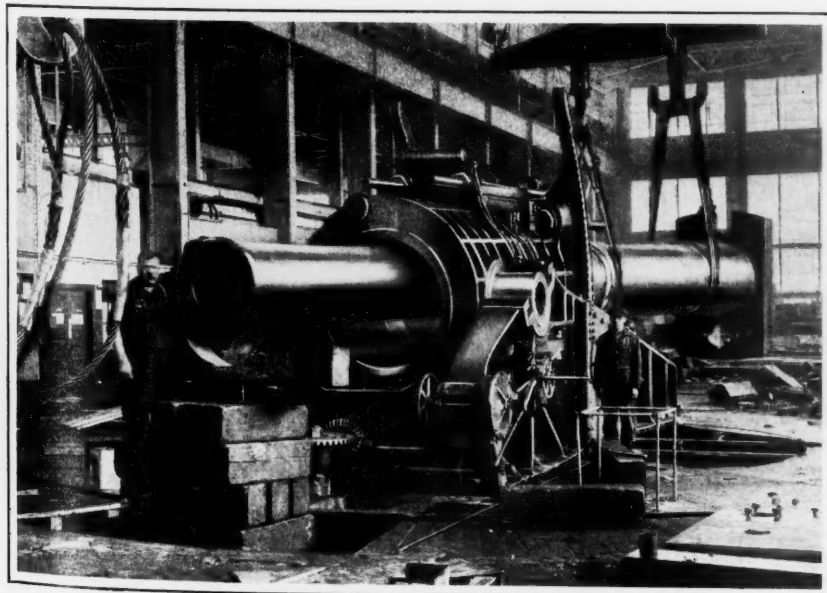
Ready for the Final Step in Mounting the Gun in the Cradle
